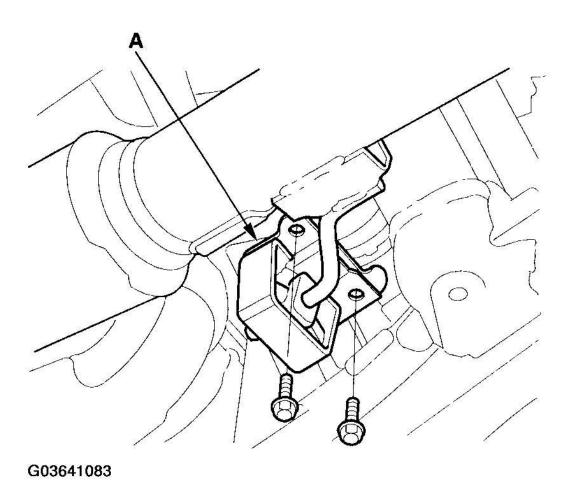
Removing 10 mm Flange Bolts Of Exhaust Rubber Mount Courtesy of AMERICAN HONDA MOTOR CO., INC.
